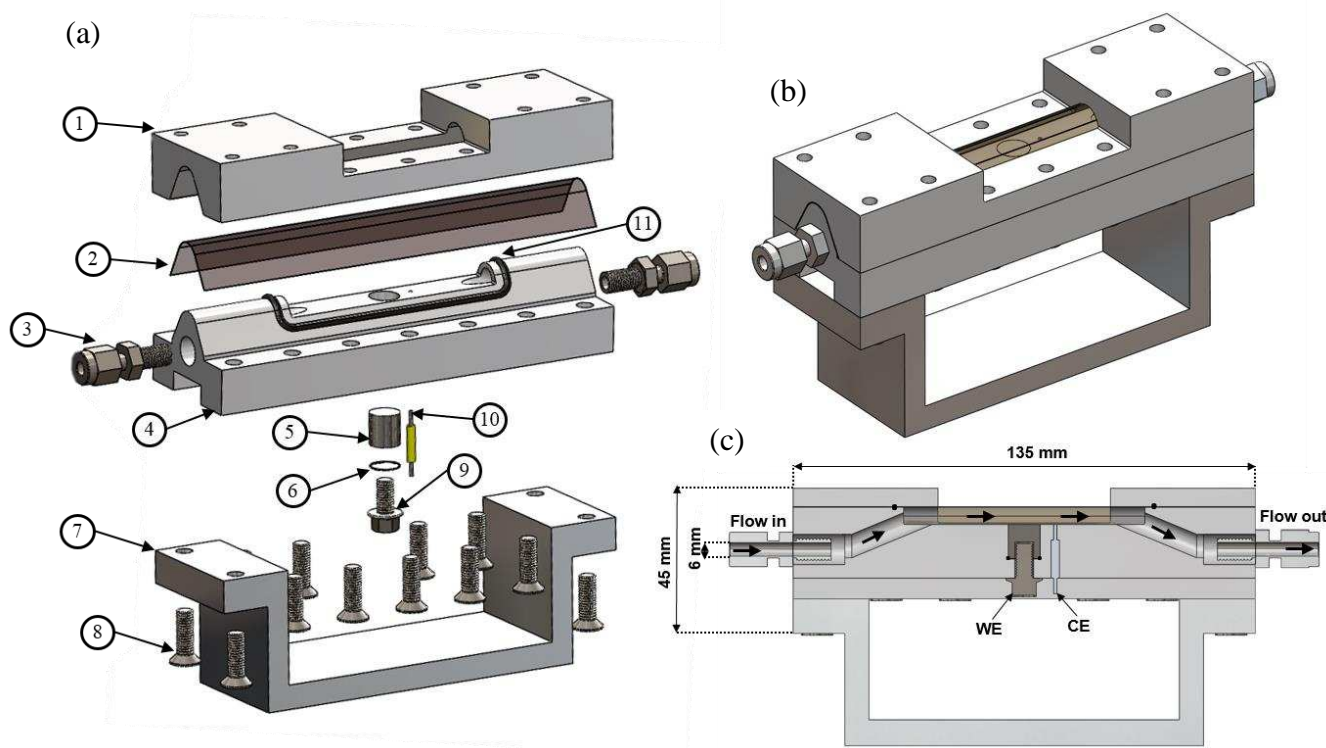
3D schematic diagrams of the SR-GIXRD cell: (a) Exploded assembly of individual components; (b) Assembled view; (c) Schematic cross section; (WE = working electrode), (CE = counter electrode).
